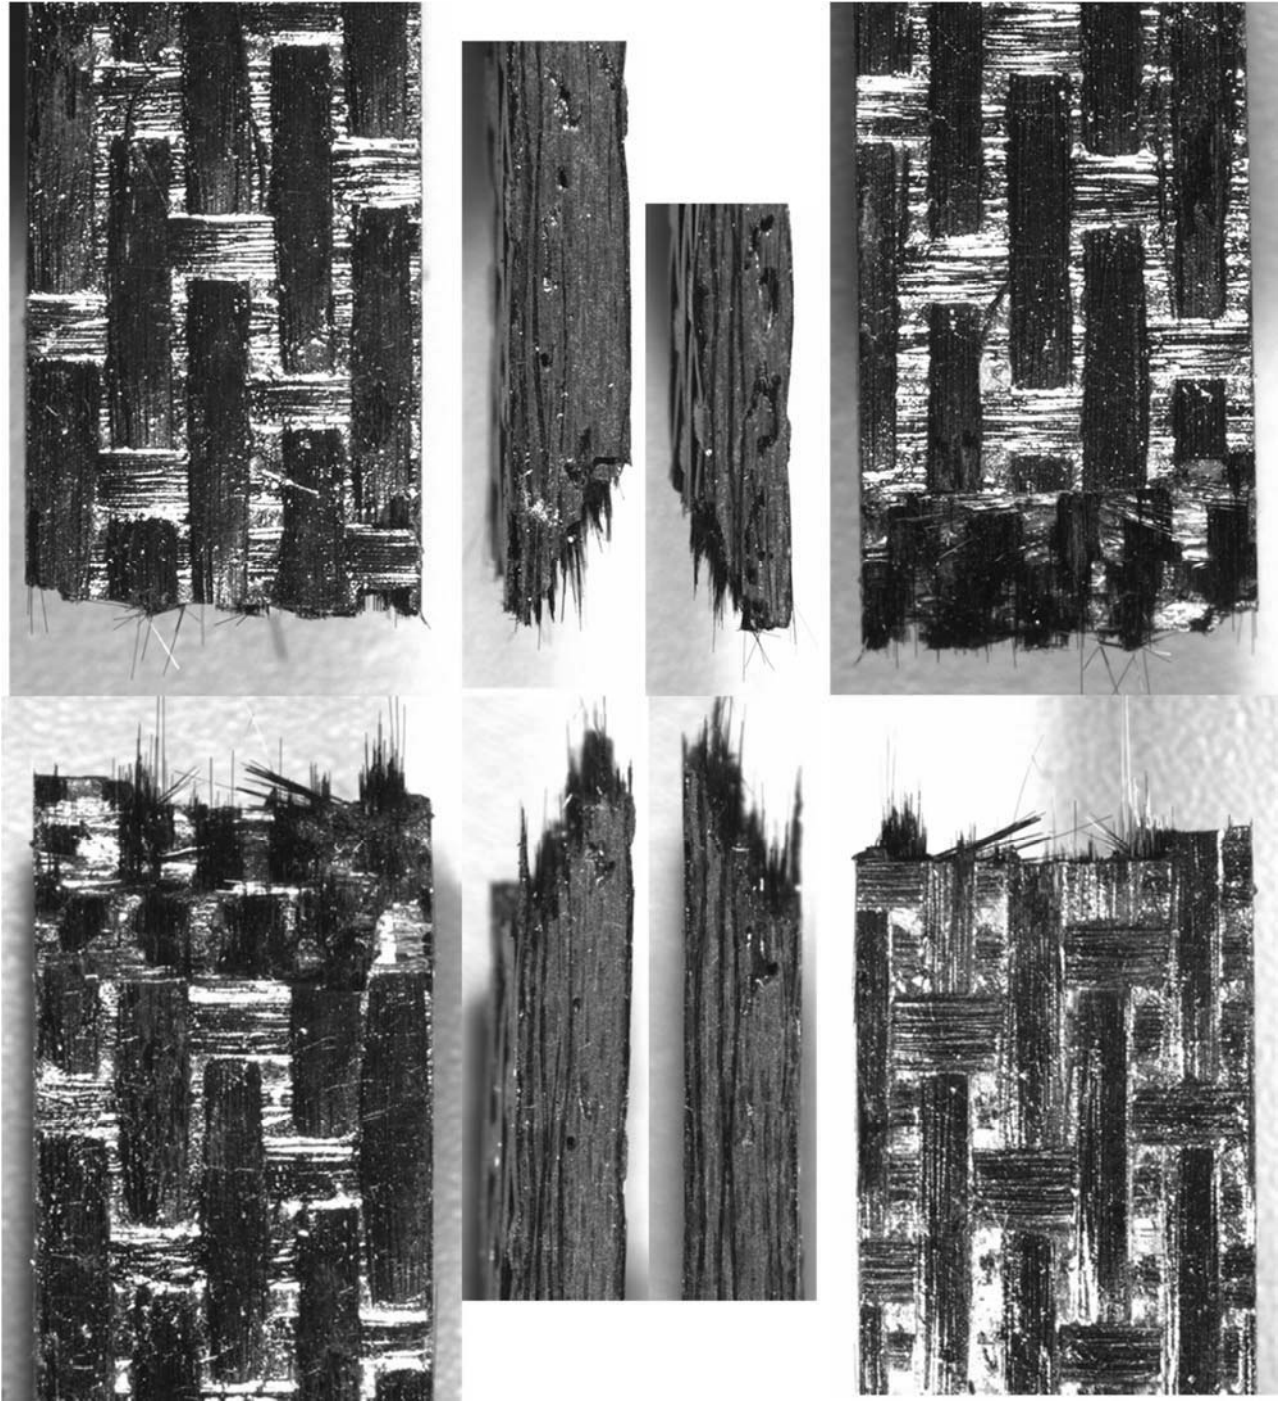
Top and bottom fracture surfaces of specimen 16-058, tested in fatigue to failure at 1200°C in steam. $\sigma_{\max} = 130$ MPa, $N_f=3,201$.
